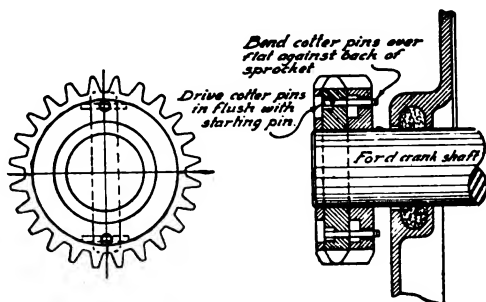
Correct Heinze-Springfield Assembly of Crankshaft Sprocket
